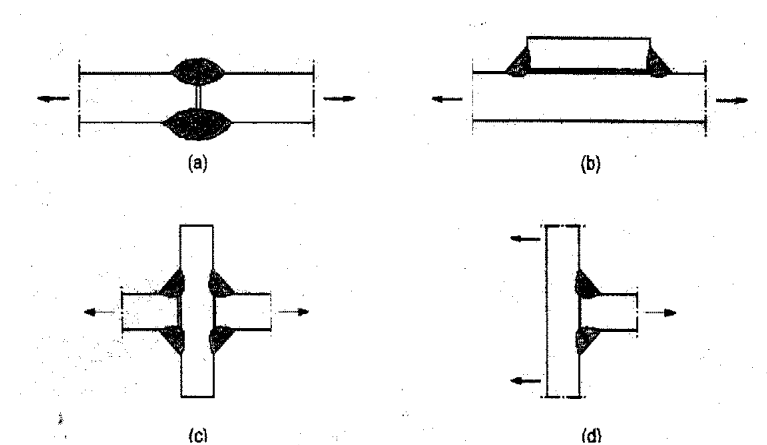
4: Examples of joints, in which an improvement might be limited by a possible root crack
